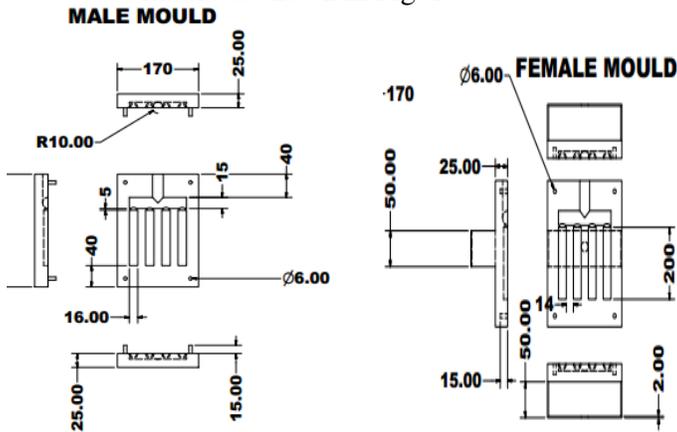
Male and Female Moulds for Squeeze Cast Moulds
